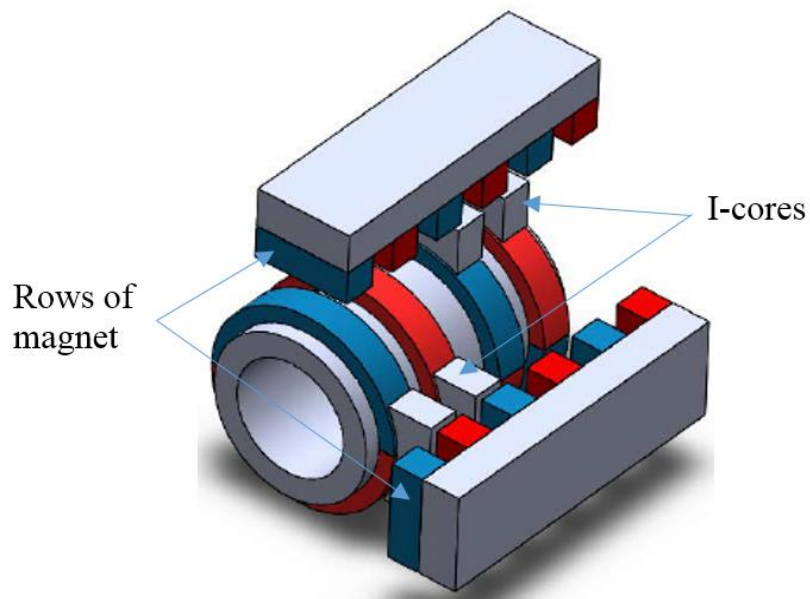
3. A linear-to-rotary magnetic gear derived from the 2-pole transverse flux machine.
